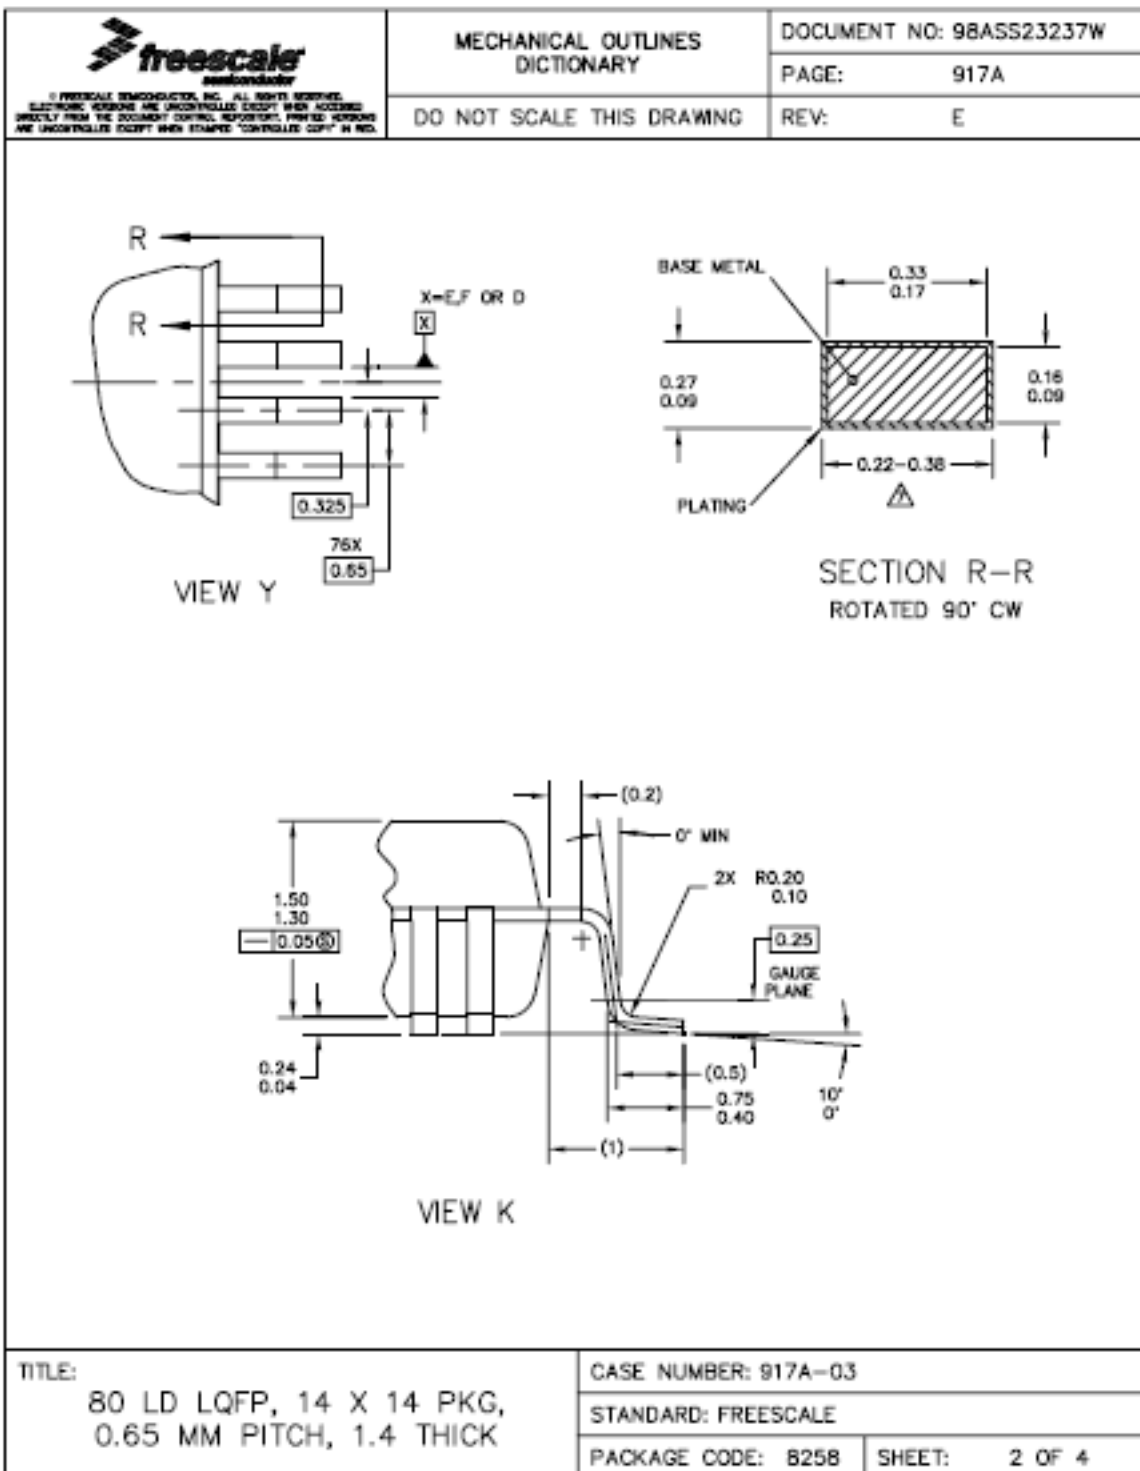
80-Pin Package Outline Drawing (2 of 4)
